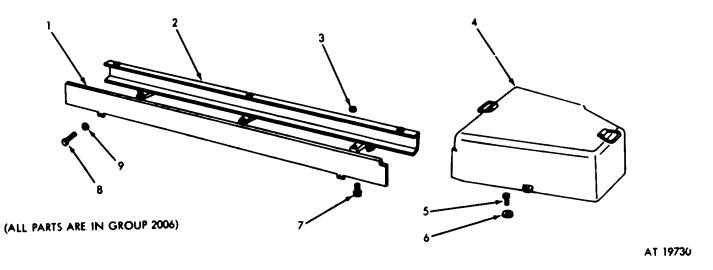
Hydraulic system armor guards (sheet 2 of 5)-partial exploded view.
